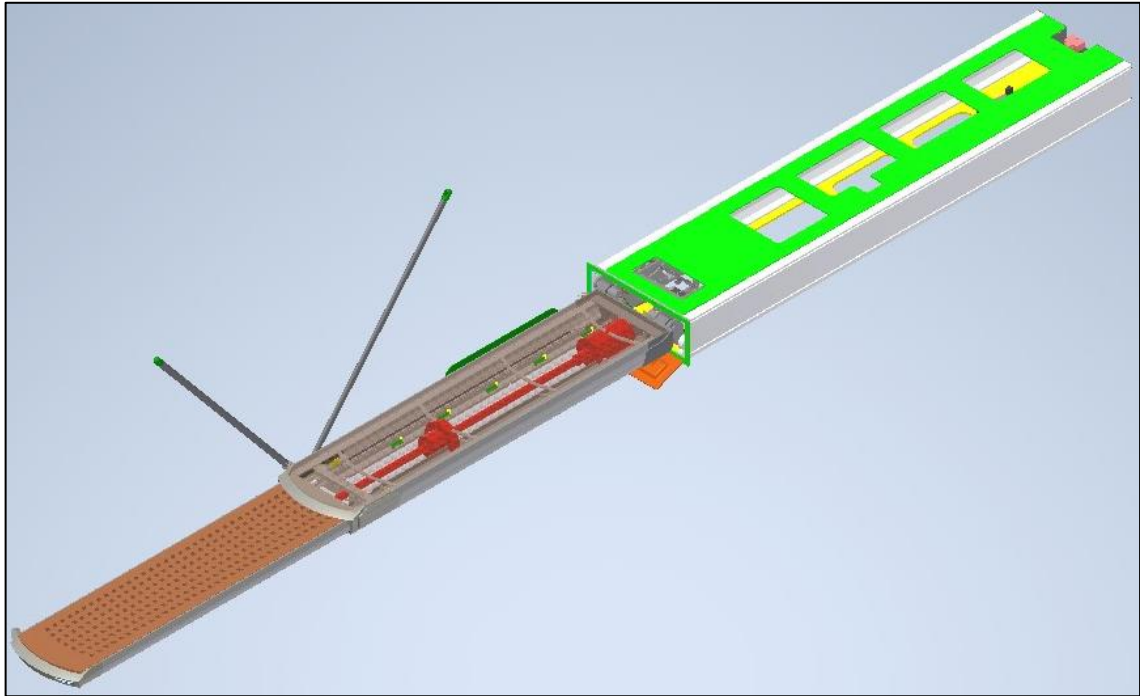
Isometric view of the passerella showing the position of the selected component, highlighted in red
